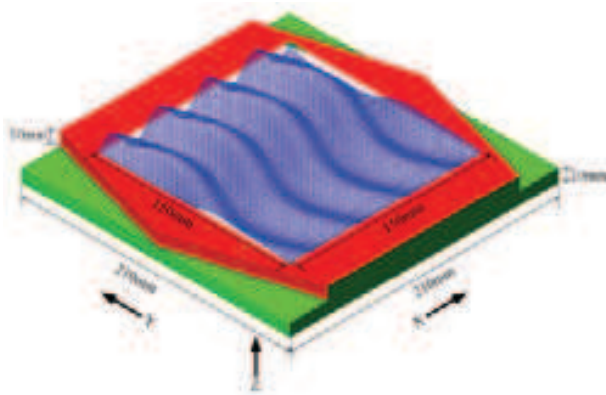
The CAD model of the sandwave surface. Fig. 18. The CNC machined workpiece of the simulated sandwave.
